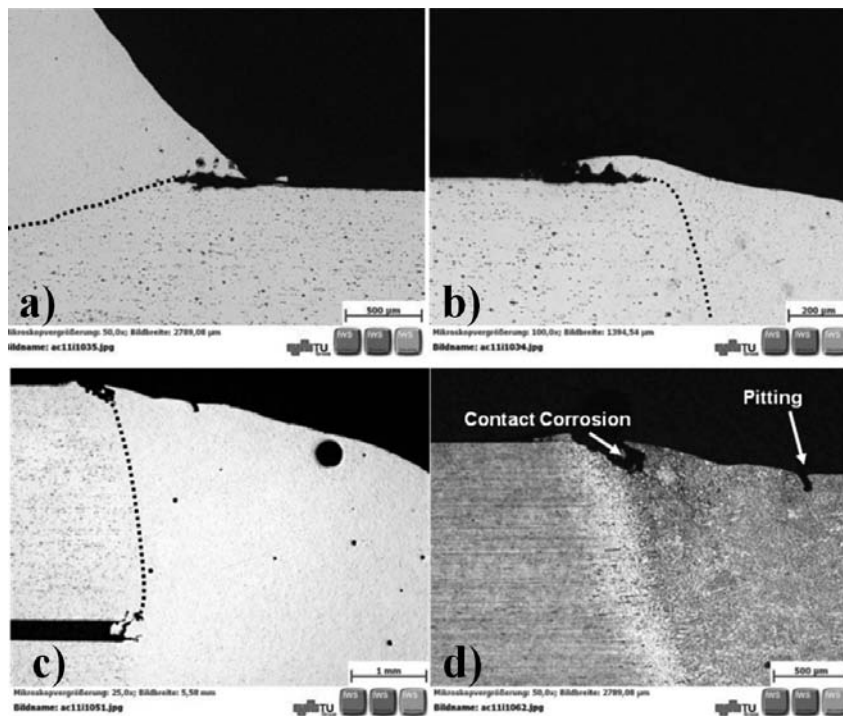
Welded AW5083-O joint cross sections in LOM/corrosion after the 480 h NSS test/local corrosion at the fusion line and weld-metal surface pores: a)–d) details 9.1 and 9.2 from Figure 8
